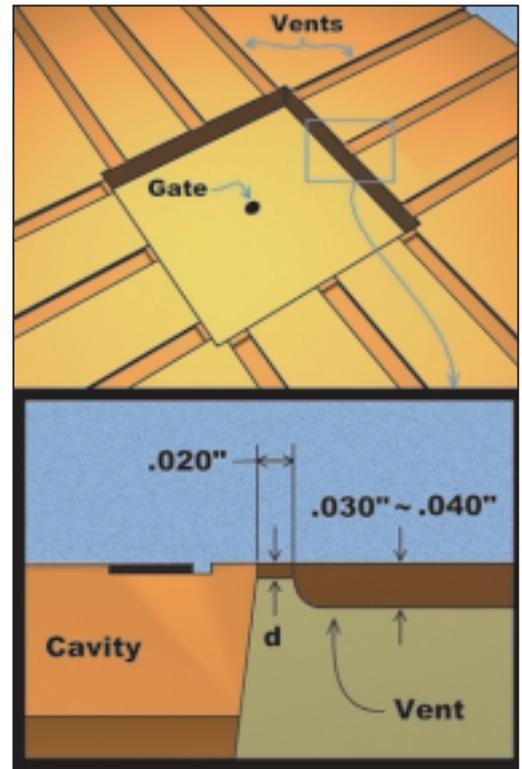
Illustration D: Venting of mold cavities, upper view showing vents bleeding to outside of mold. Lower view illustrates typical dimensions for vent and bleed off.
